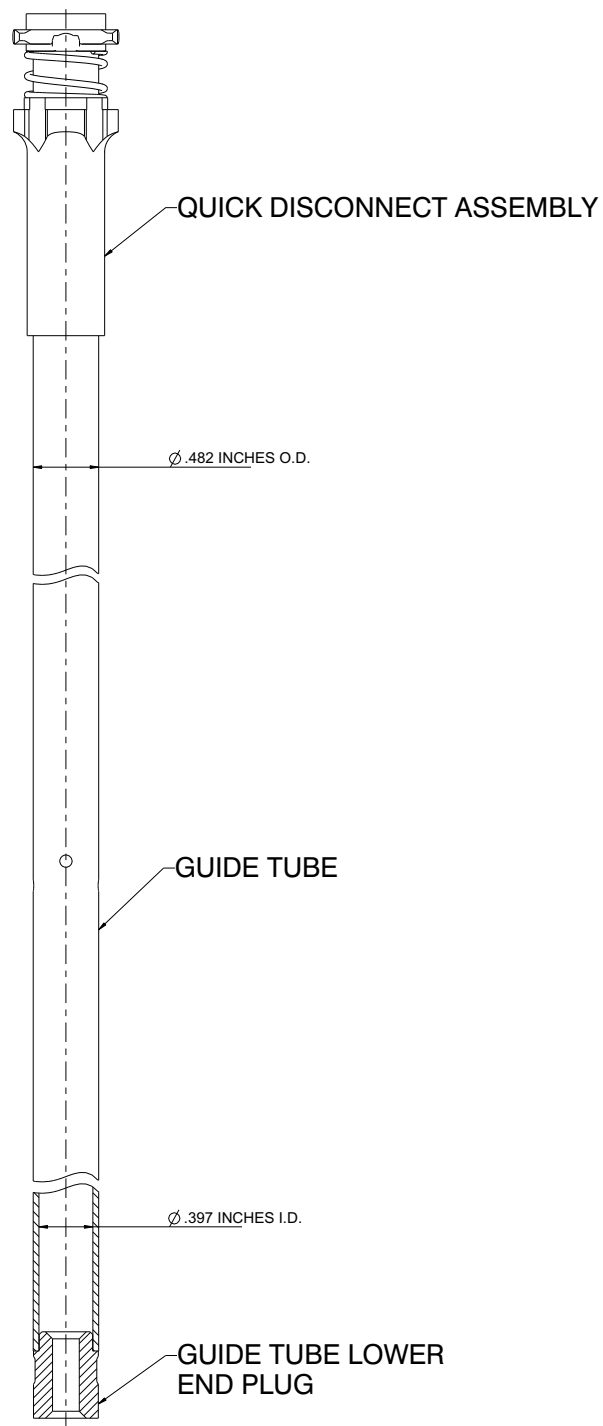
Guide Tube Quick Disconnect Top Nozzle Connection
